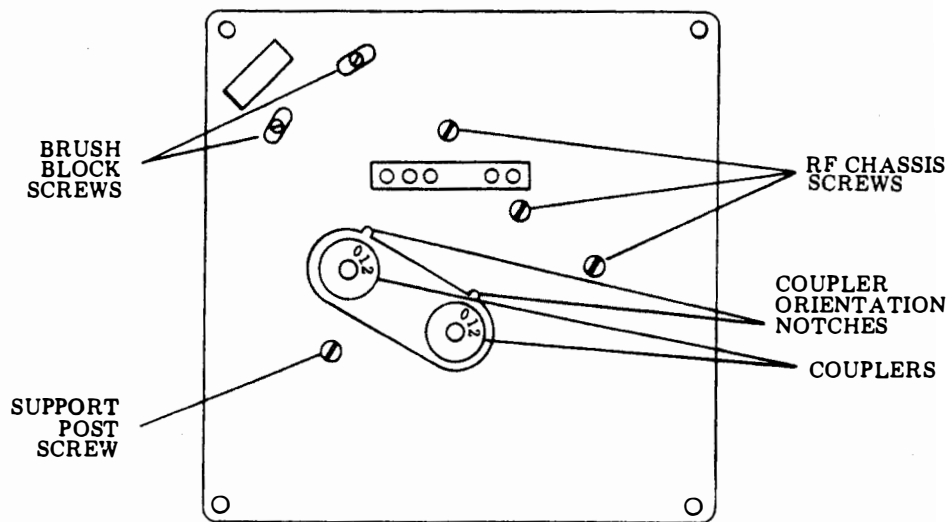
RF Amplifier Assembly A2A4, Bottom View, Disassembly Screw Locations
